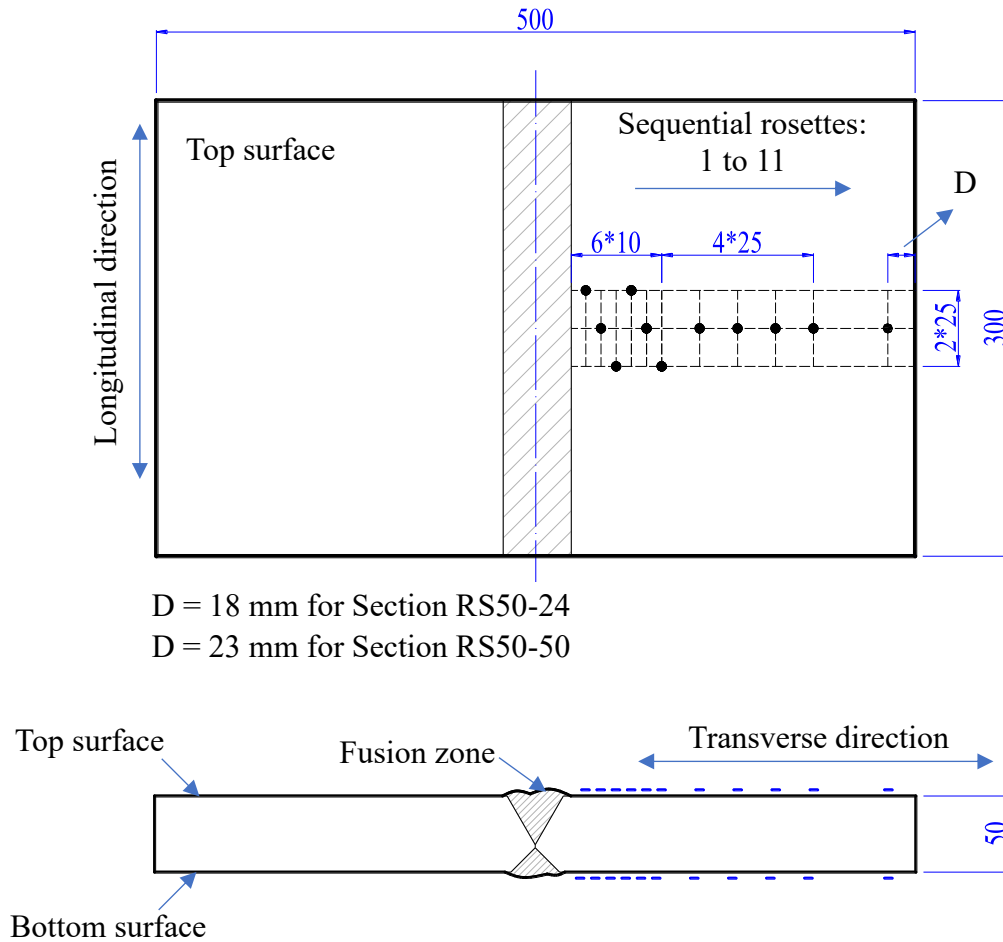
Rosette arrangement pattern on top and bottom surfaces
